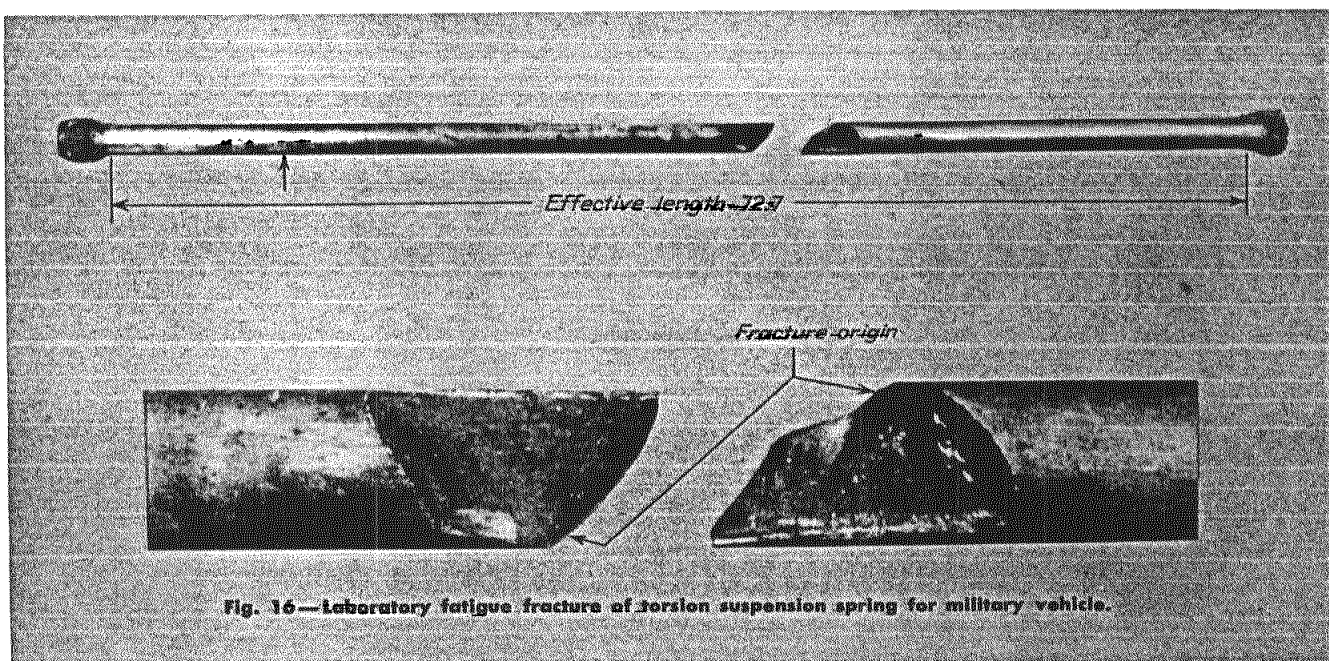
Laboratory fatigue fracture of torsion suspension spring for military vehicle.
